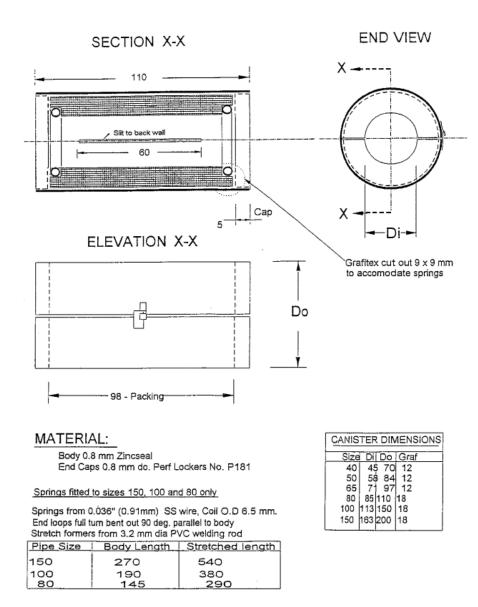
Internally mounted Fyreguard wall collar details as shown in WFRA 91622 and WFRA 91633 – dimensions in mm
